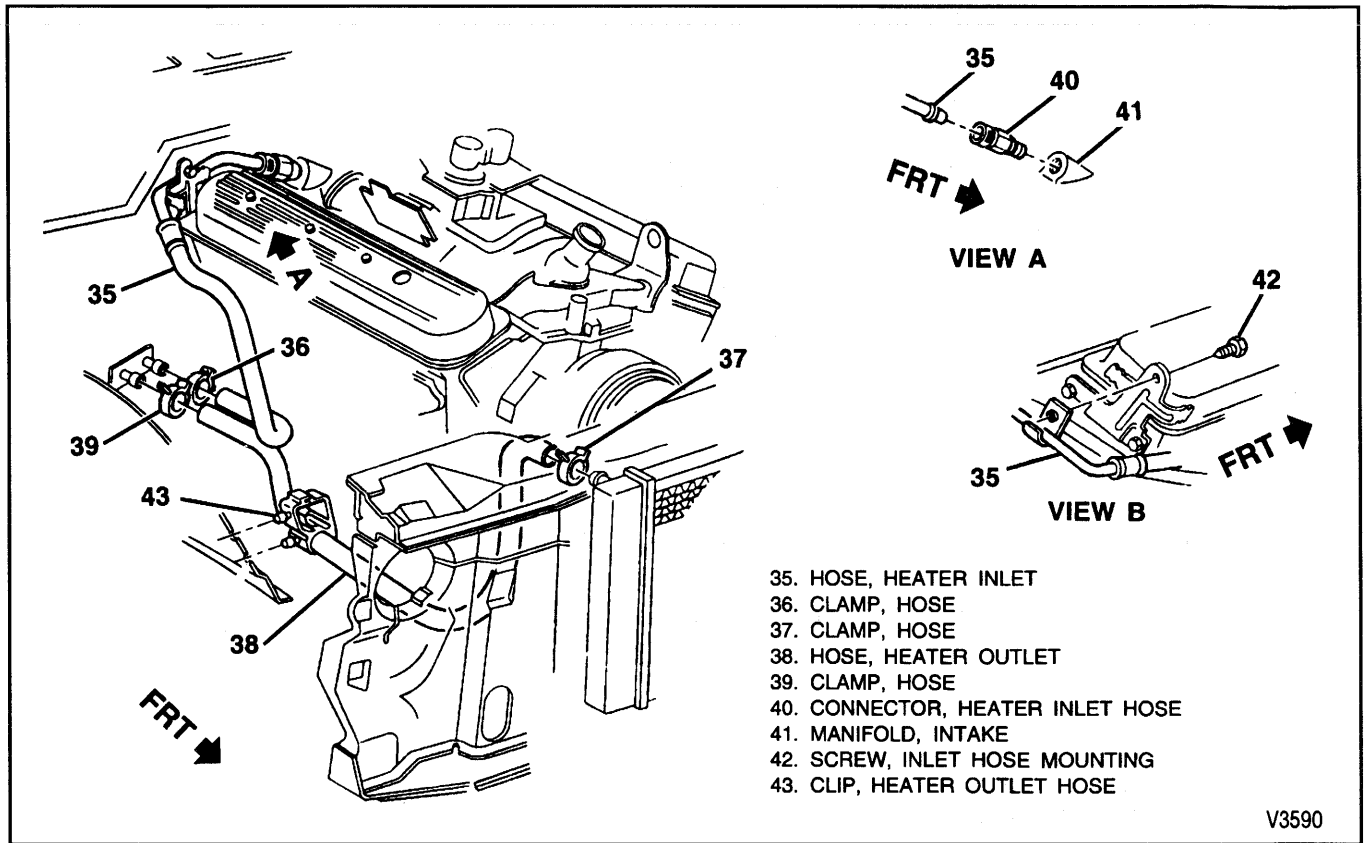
Heater Hose Routing (4.3L, 5.0L, and 5.7L Engines)
